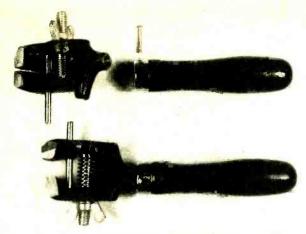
PIN VISE is converted into PC board holder by drilling and tapping.
